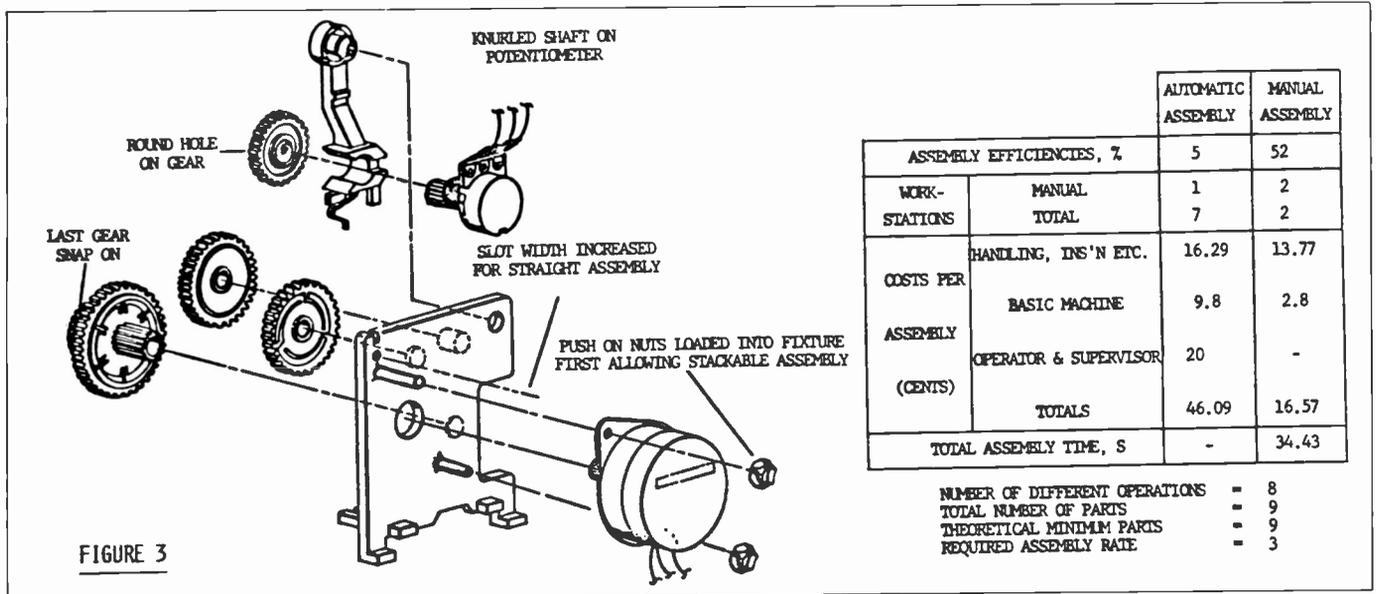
Recommended gear assembly achieving a stackable assembly and the theoretical minimum number of parts. The parts count was reduced by three and assembly time was reduced by 58 seconds.
